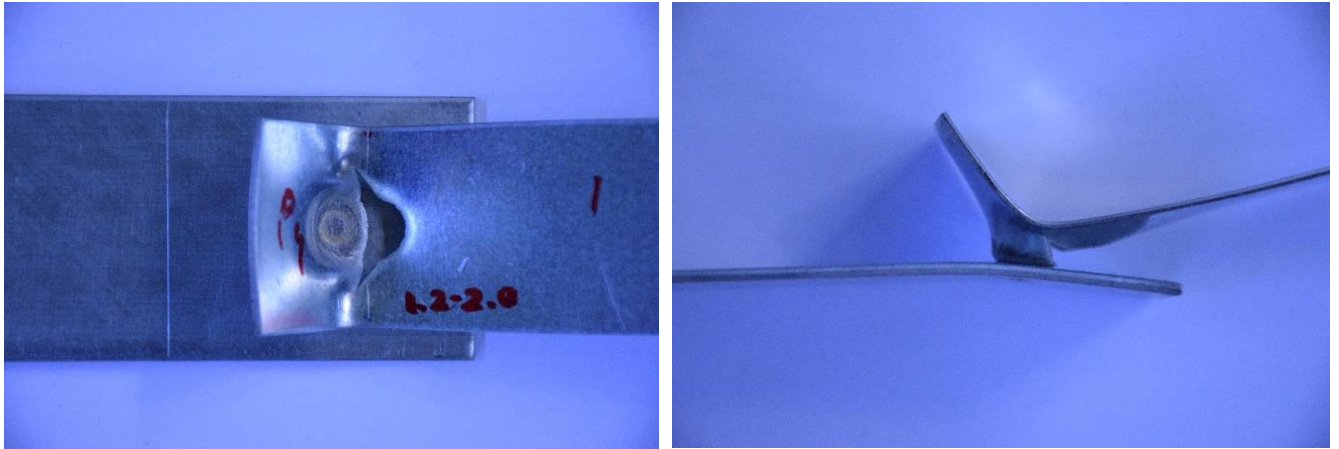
Failure mode of SW-1.2-2.0 specimens
